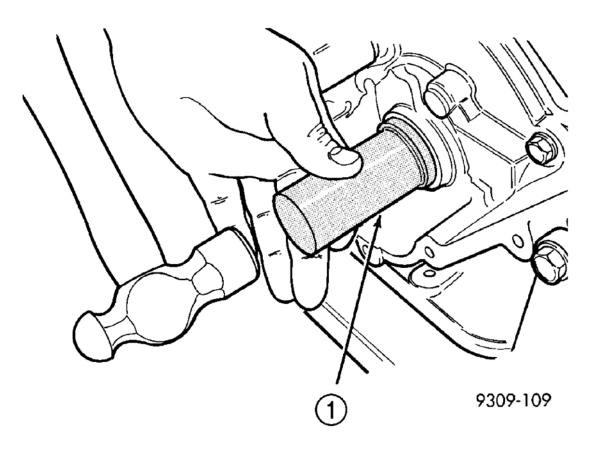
Installing Crankshaft Oil Seal With Special Tool 6342 Courtesy of CHRYSLER LLC
